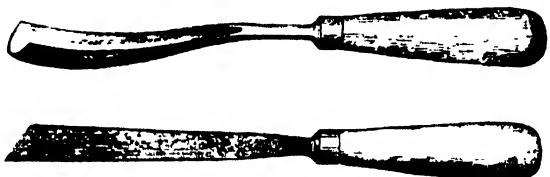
, 204.—WOOD-CARVING TOOLS. V OR PARTING TOOL AND FLAT GOUGE.
